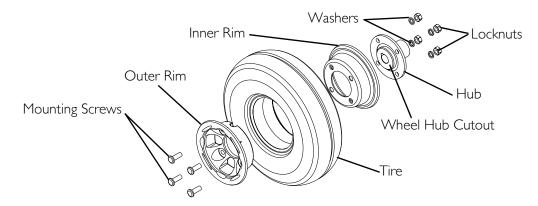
Replacing the 2-Piece Wheel Rim and/or the Foam Filled or Pneumatic Tires
